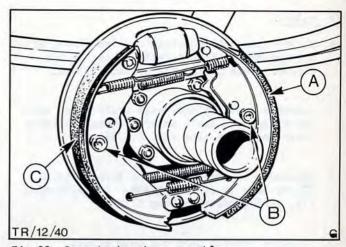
Rear brake shoe assembly. (LCY illustrated)
